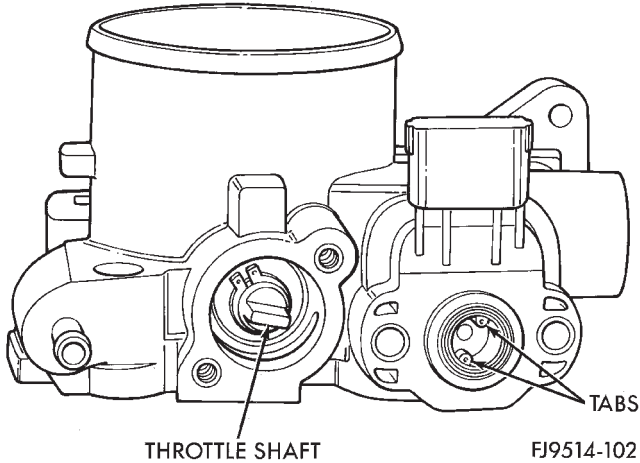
Indexing Throttle Position Sensor—2.5L Engine
